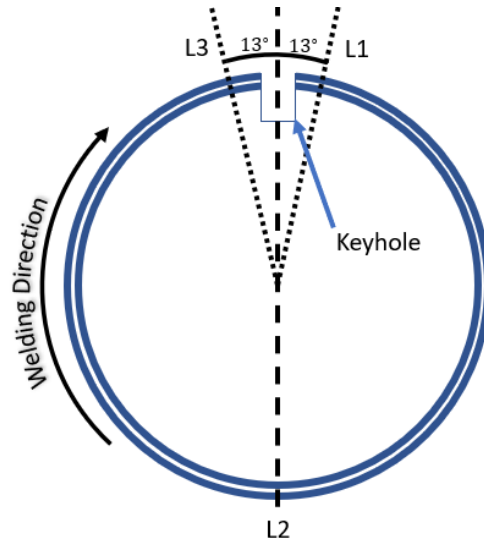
Locations of tensile shear specimens with respect to the weld keyhole.
